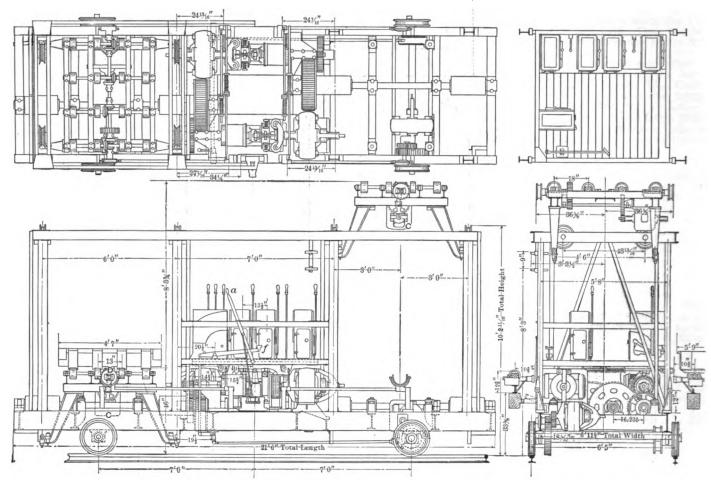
BATTERY ELEVATING AND TRANSFER TABLE, ENGLEWOOD & CHICAGO ELECTRIC STREET RAILWAY CO.
